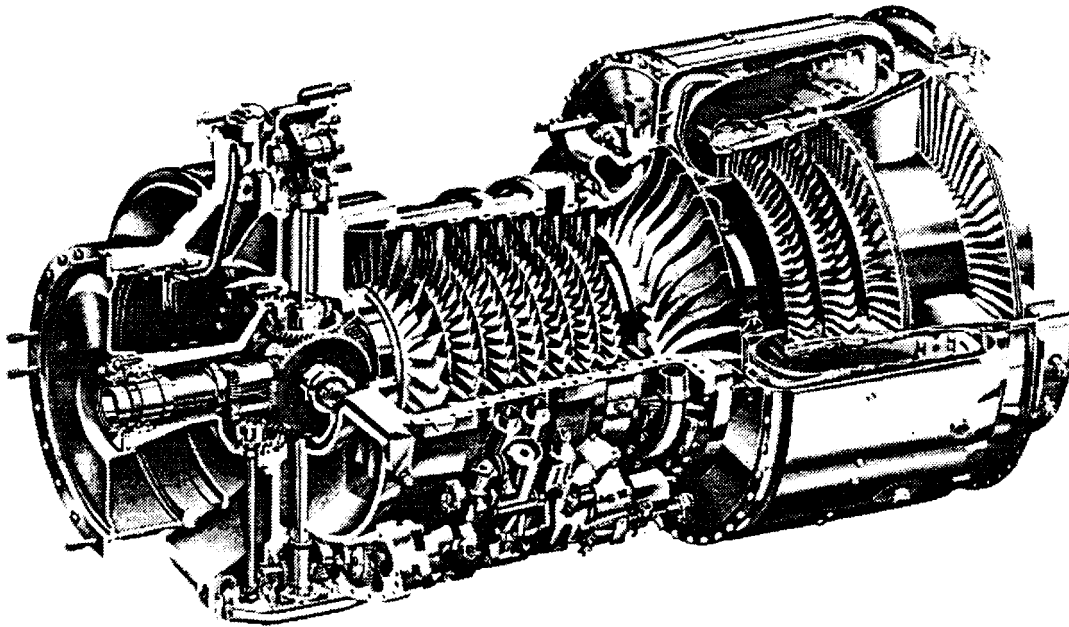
Cutaway Sectional View of the T55-L-712 Turboshaft Engine.
